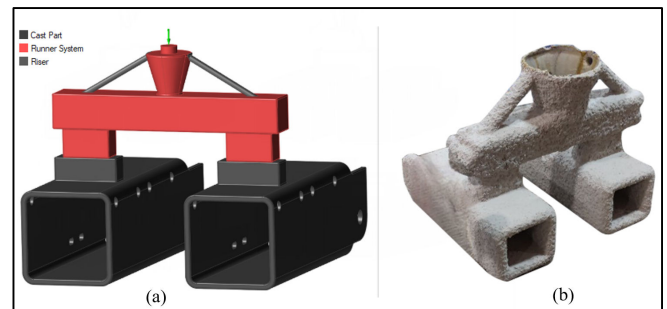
(a) The CAD model and (b) the actual casting component of the optimized casting design fabricated
